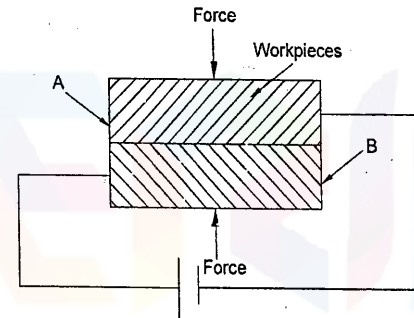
Schematic of diffusion welding heating by electrical resistance
